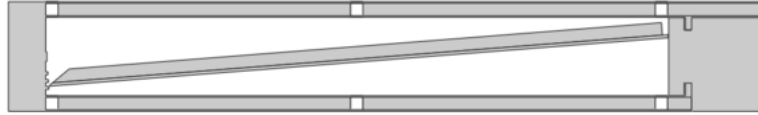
Cutaway jig assembly utilizing a 3-point bending configuration for easy removal after installation.
